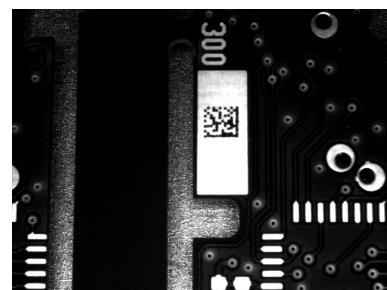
Dot Matrix Code Directly Marked on PCB Copper Pad by Using Ink-Jet Technology
